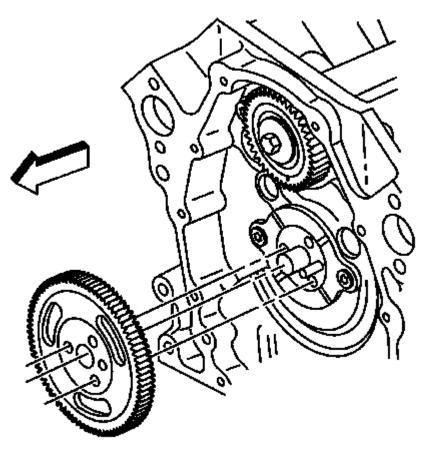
View Of Balance Shaft Drive Gear Courtesy of GENERAL MOTORS CORP.
